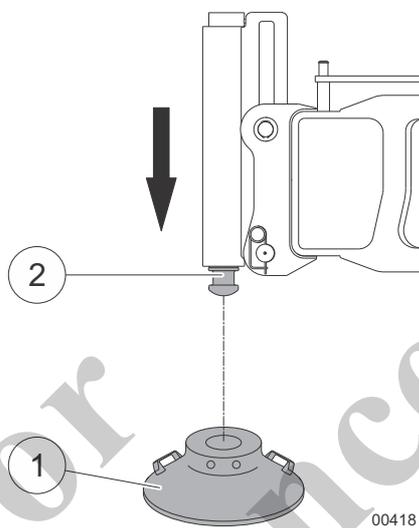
Placing the outrigger pad under the outrigger cylinder
